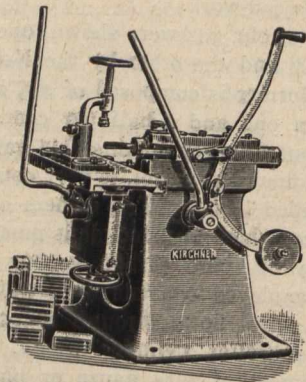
Horizontal Slot Boring and Mortising Machine.
